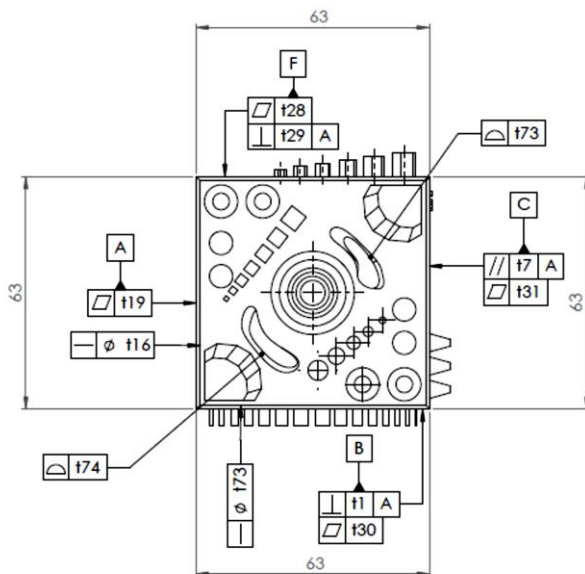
A partial engineering drawing of the proposed test artefact: overview of the dimensions (dimensions are in mm)
